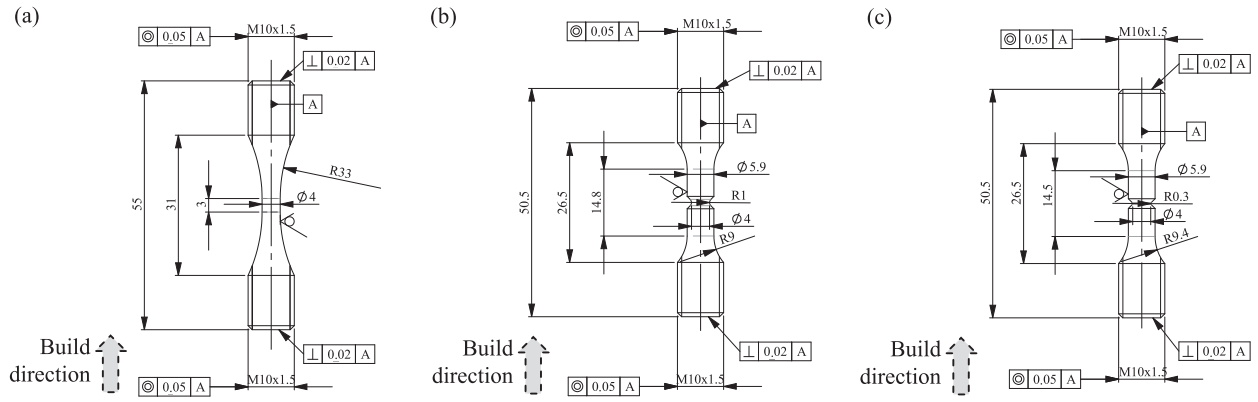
Technical drawings, after machining of the threaded ends, of: (a) plain specimen, (b) VR1 specimen and (c) VR03 specimen. The dimensions are in mm.
